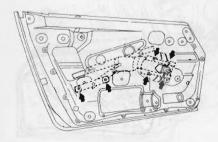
Removing screws attaching glass back plate to guide channel B
